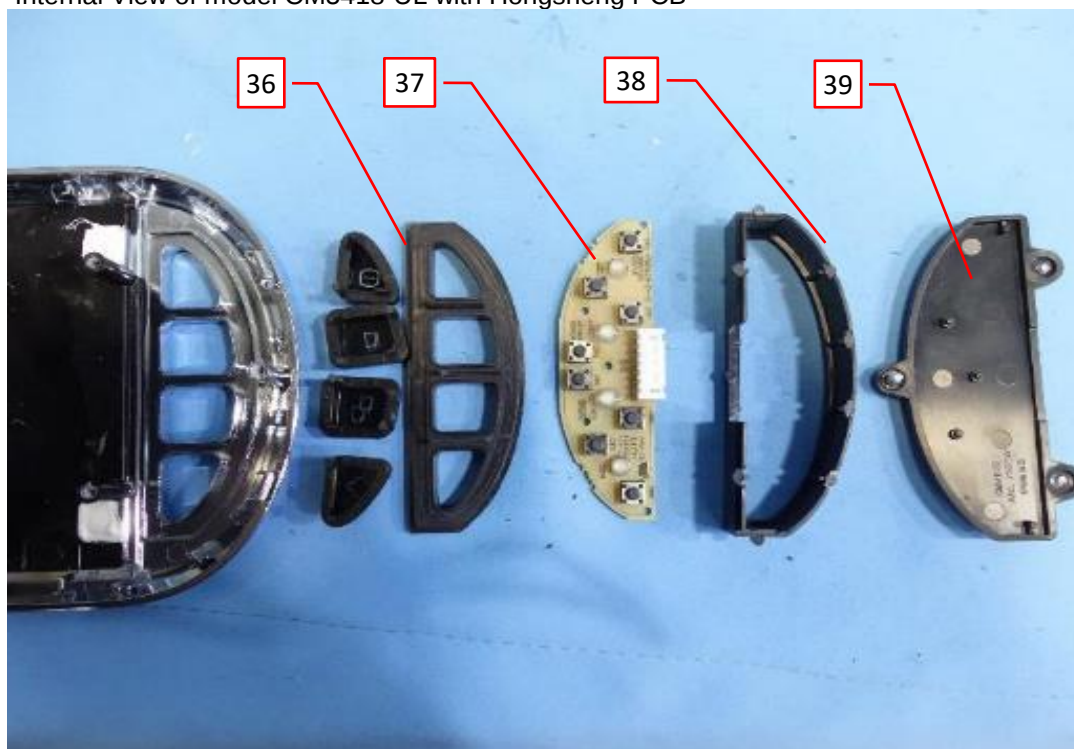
Internal View of model CM5418-UL with Hongsheng PCB
